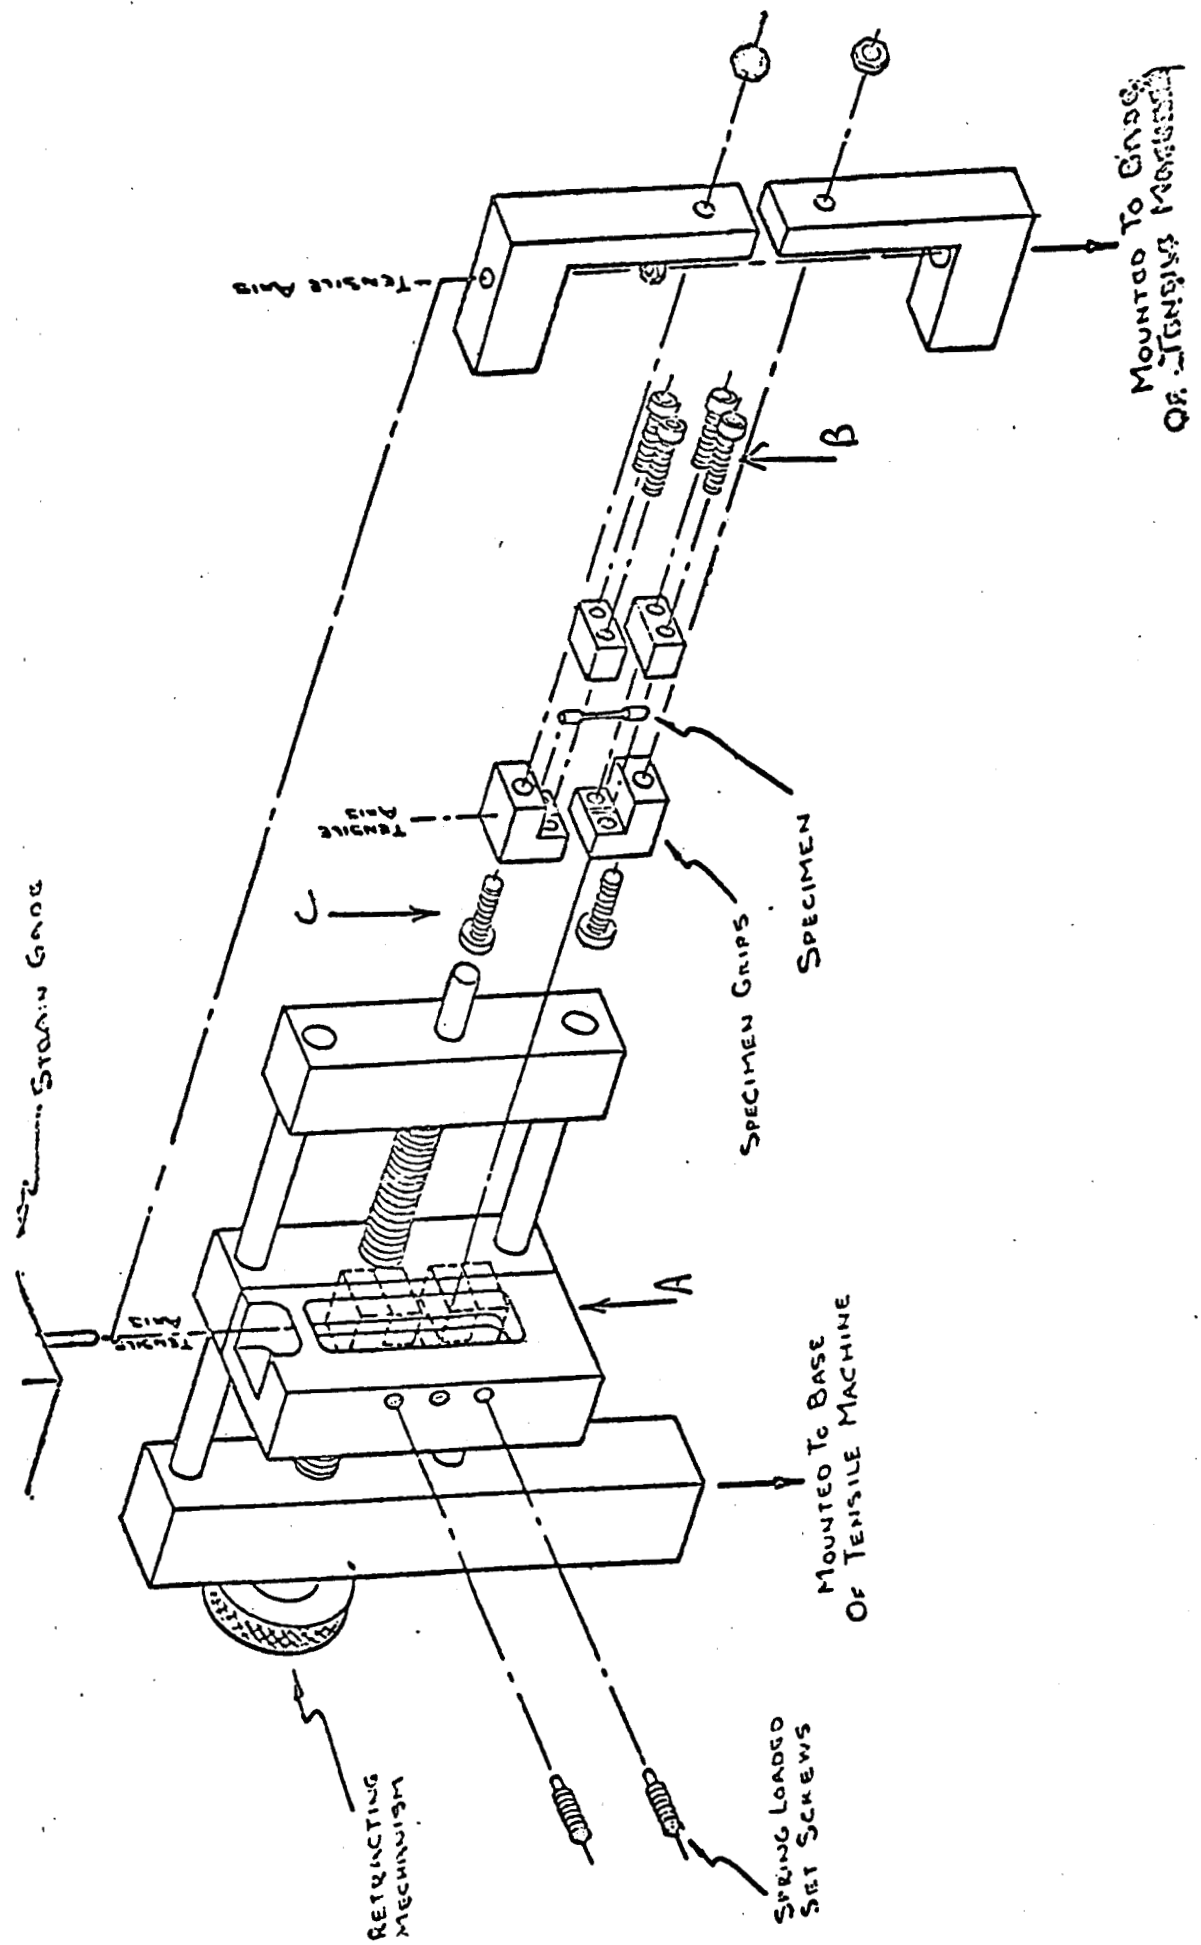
SCHEMATIC DRAWING OF MOUNTING RIG FOR P.G. FILAMENTS
